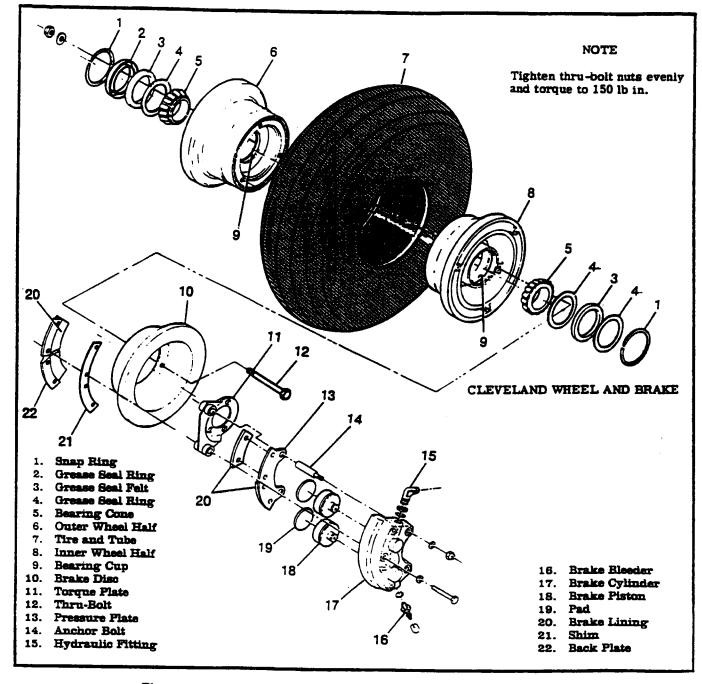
Main Landing Gear Wheel. Tire and Brake Assembly
